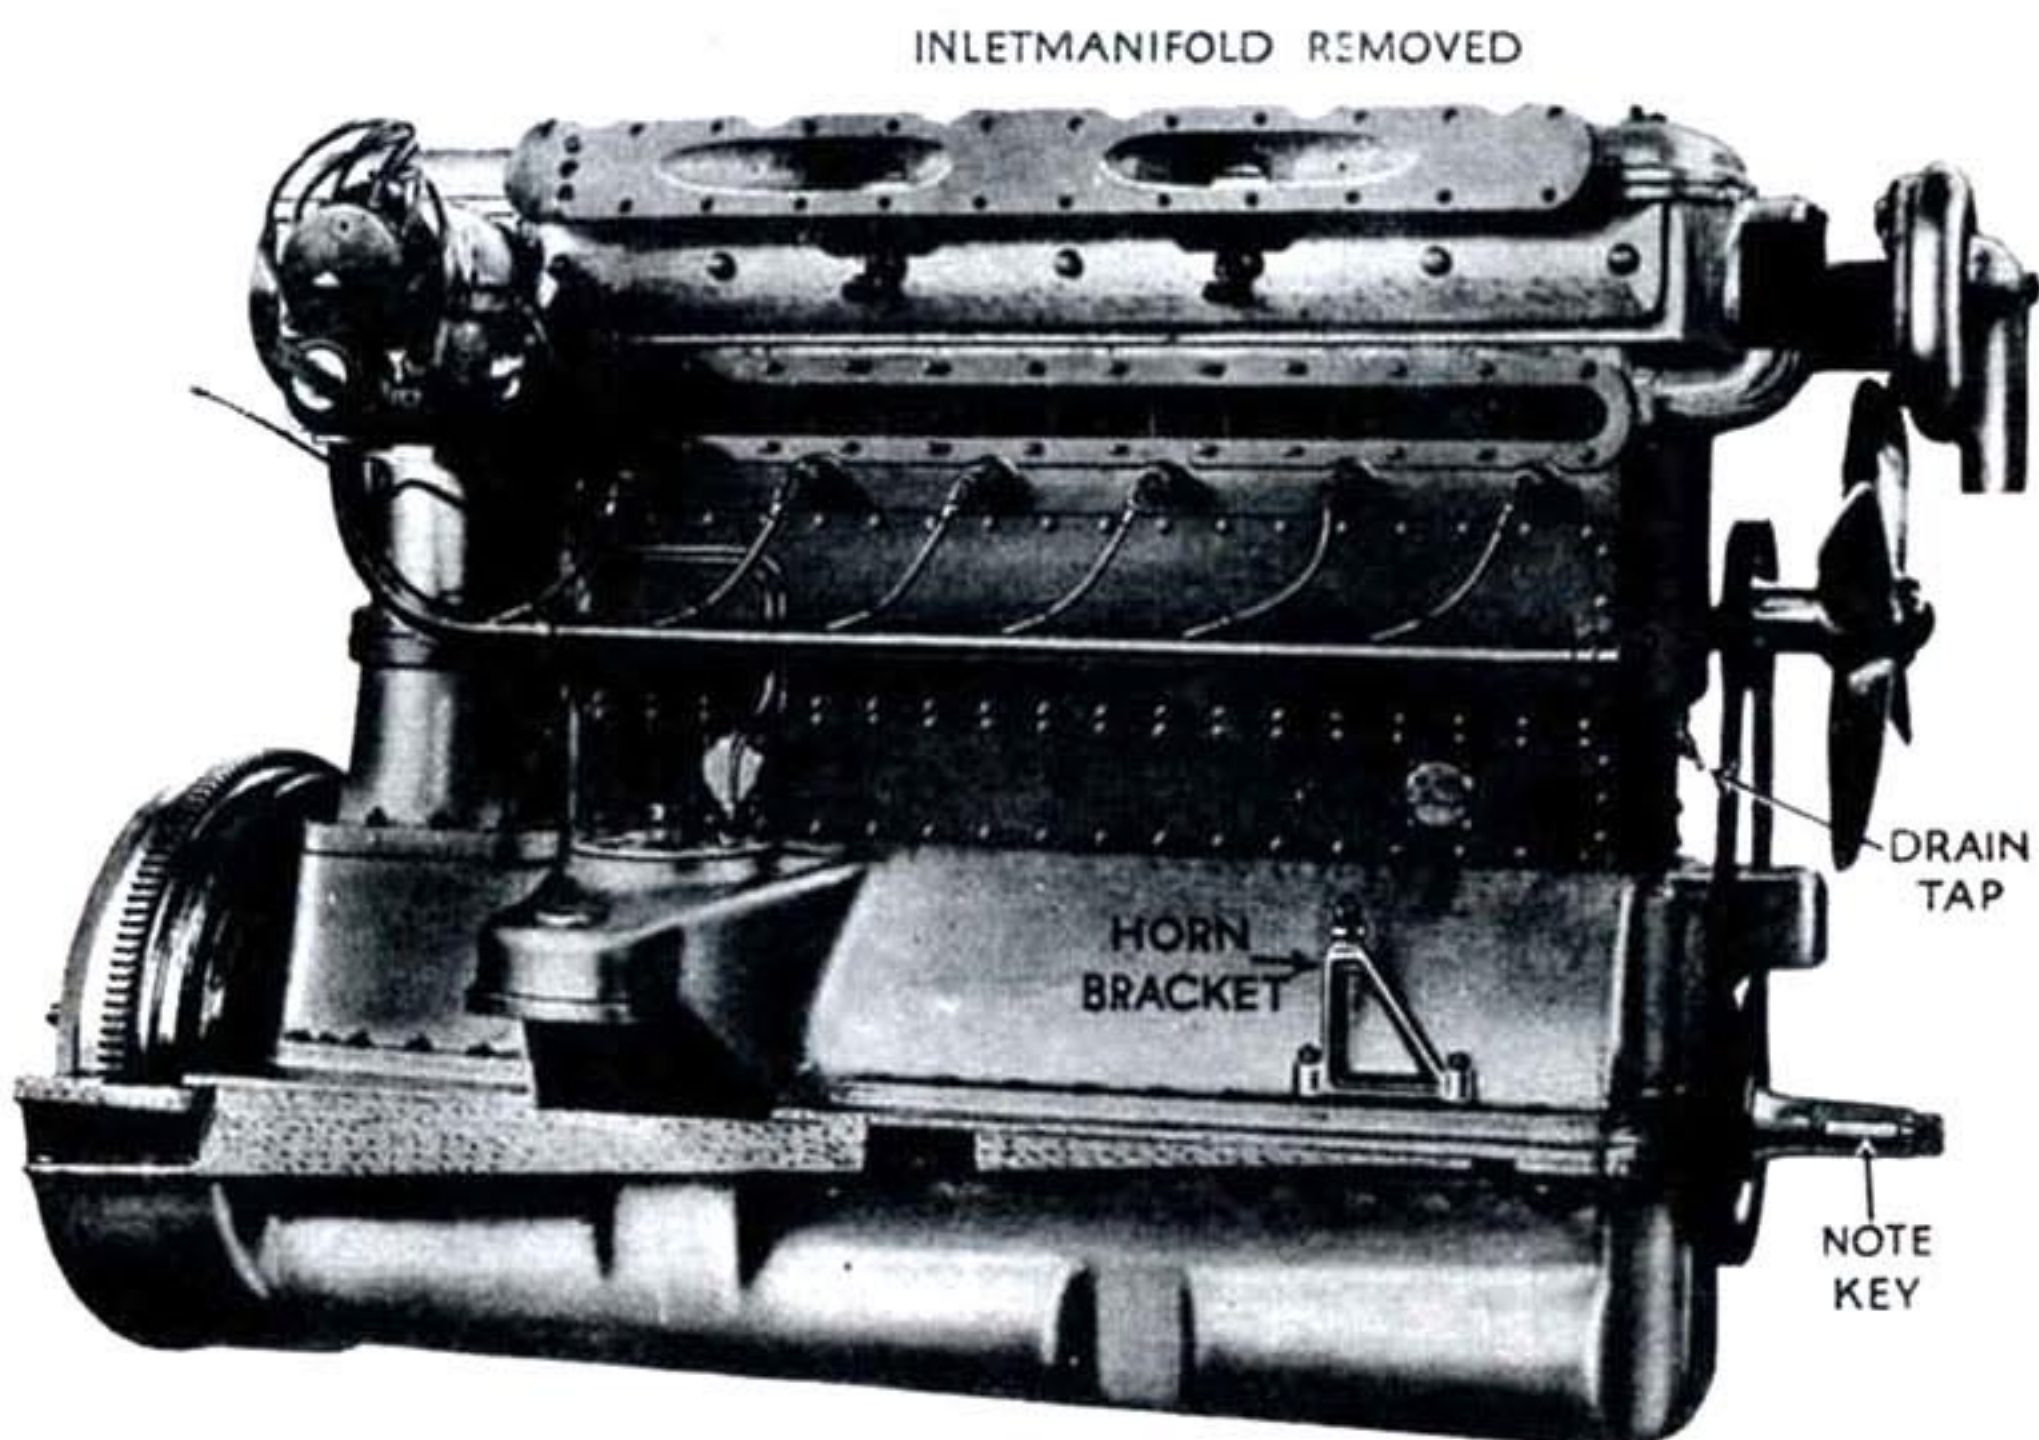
INLET SIDE OF ENGINE WITH MANIFOLD REMOVED.
